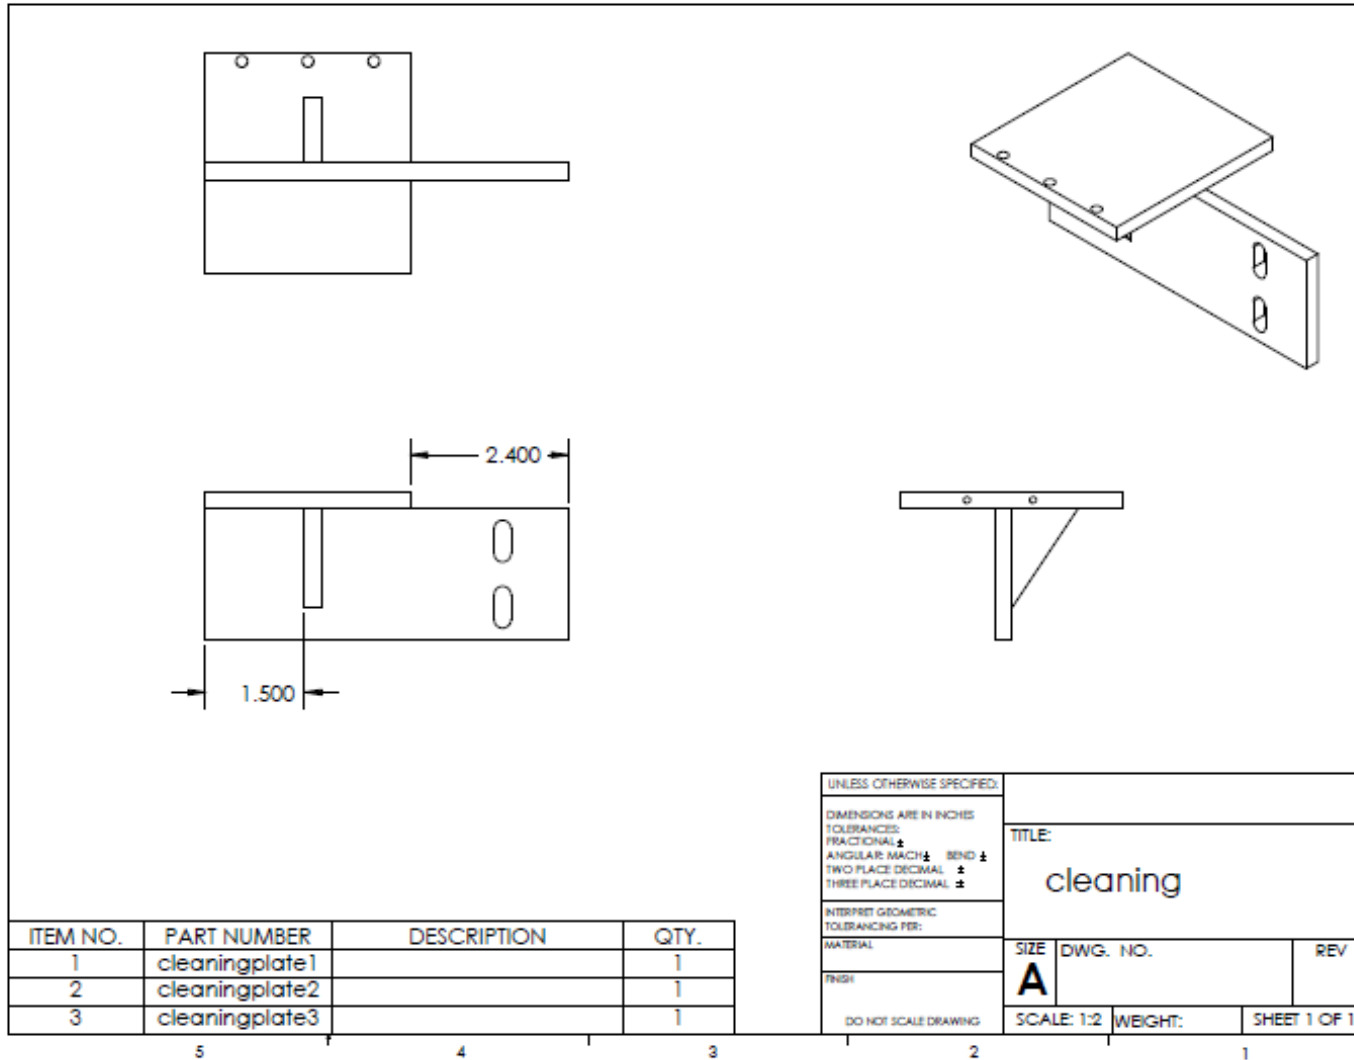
engineering drawing of cleaning station mounting bracket assembly
